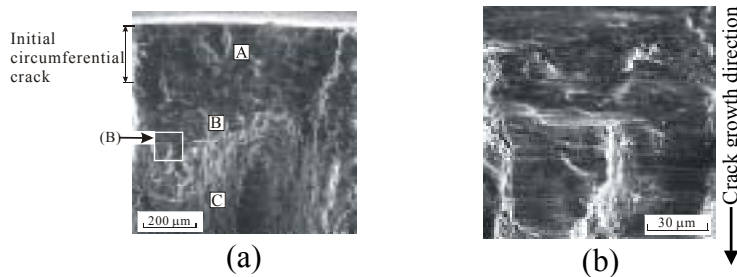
Fracture surface of Mode III fatigue crack growth.
